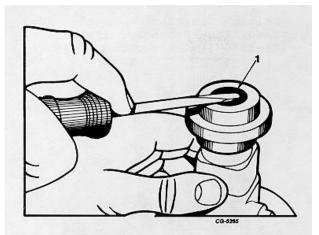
Removing Lower Oil Seal (Distributors for V-537 Engine)
